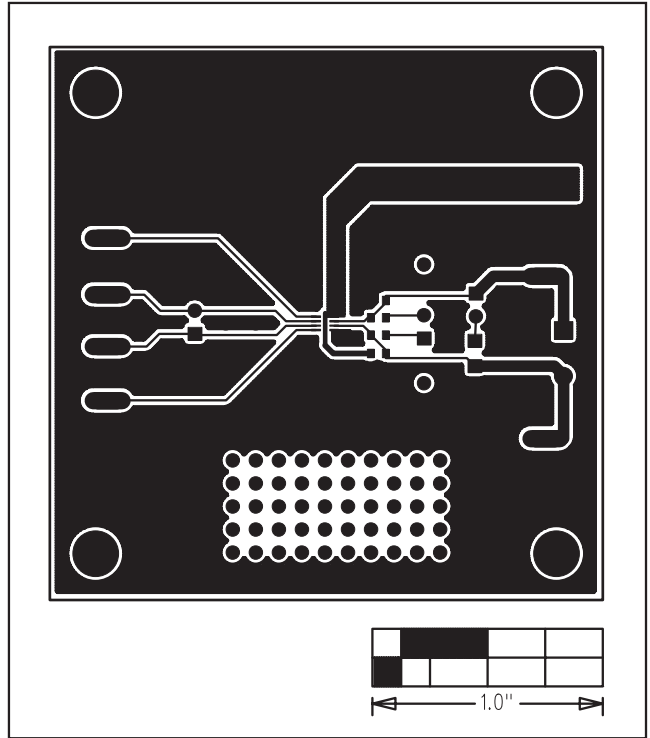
MAX13485E EV Kit PCB Layout—Component Side
